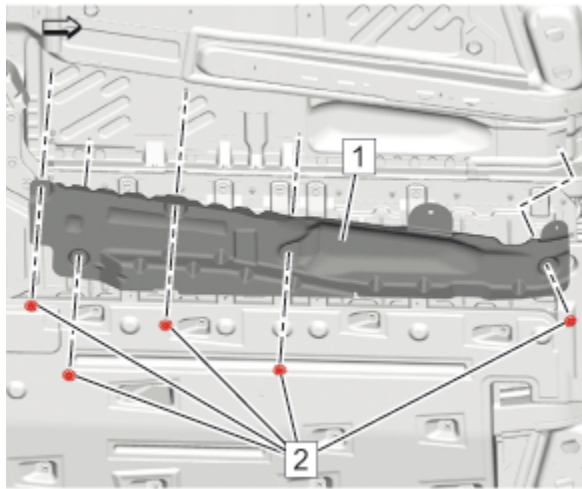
Exhaust Front Underbody Heat Shield And Retainer
